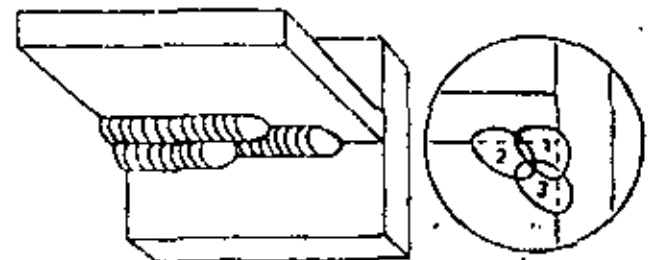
Technique for overhead and horizontal butt welds with fast-freeze electrodes. These welds are best made with a series of stringer beads.
